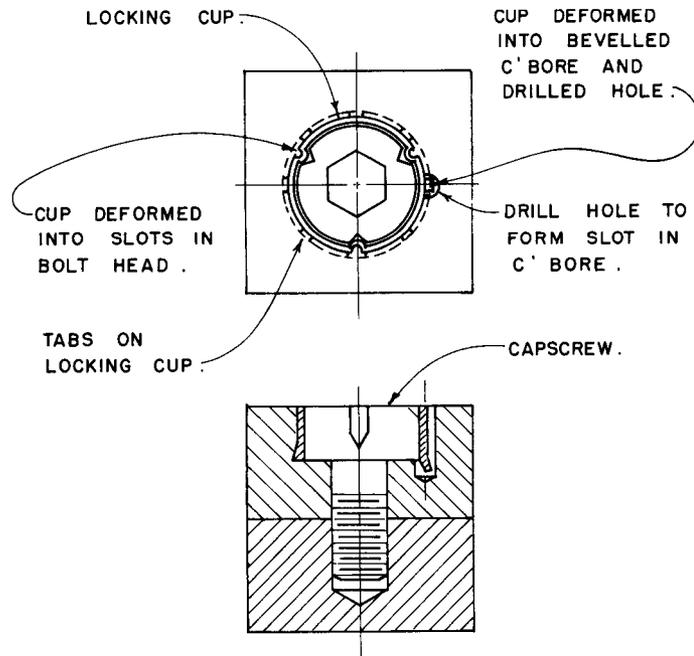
Class-A Locking Cup for Recessed Head Cap Screw.
